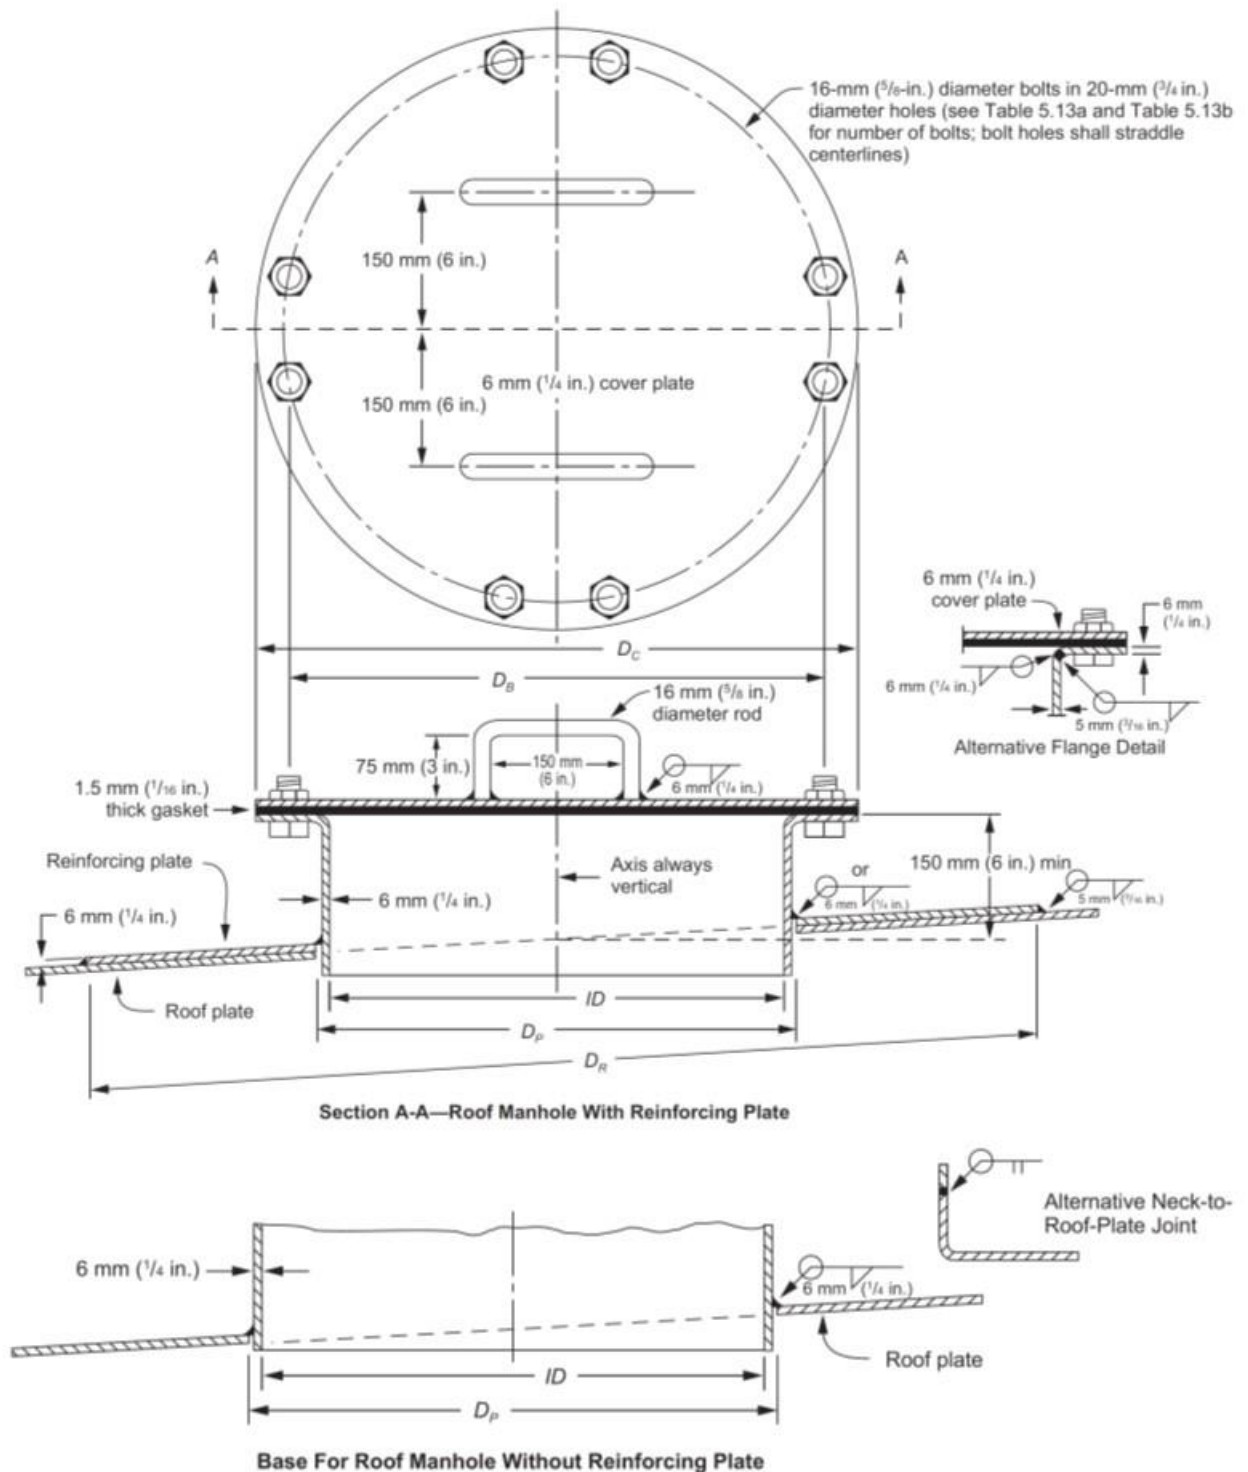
Roof Manholes (see Table 5.13a and Table 5.13b)
